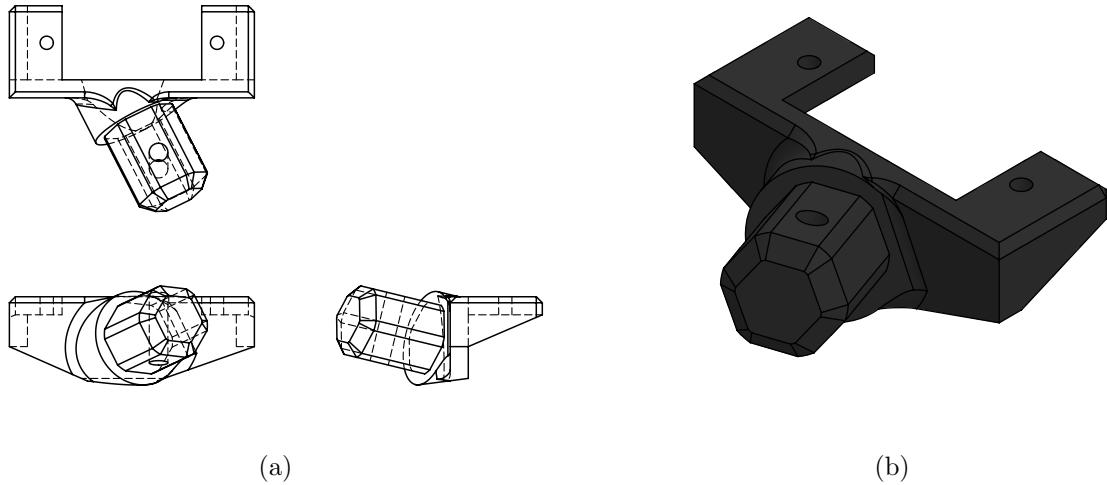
Detailed drawings of the wheel pivot component for one corner of the suspension system
